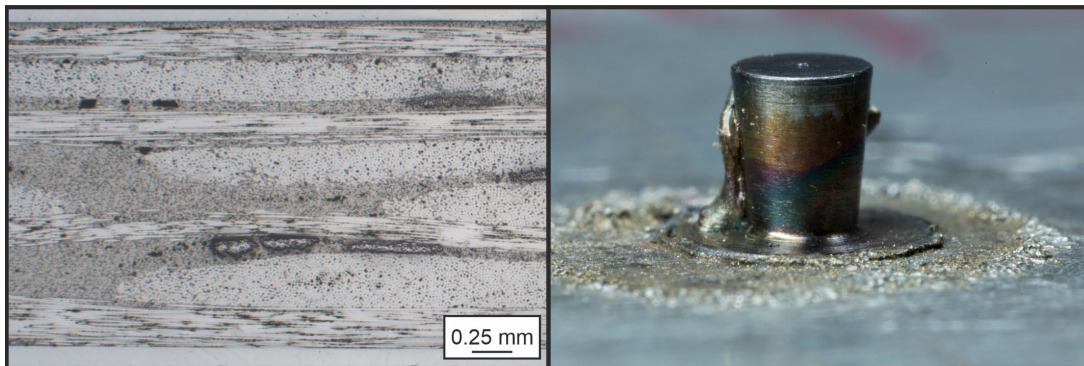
Microsection of undisturbed CFRT laminate (left) and photography of welded pin structure with large welding residues (right)
